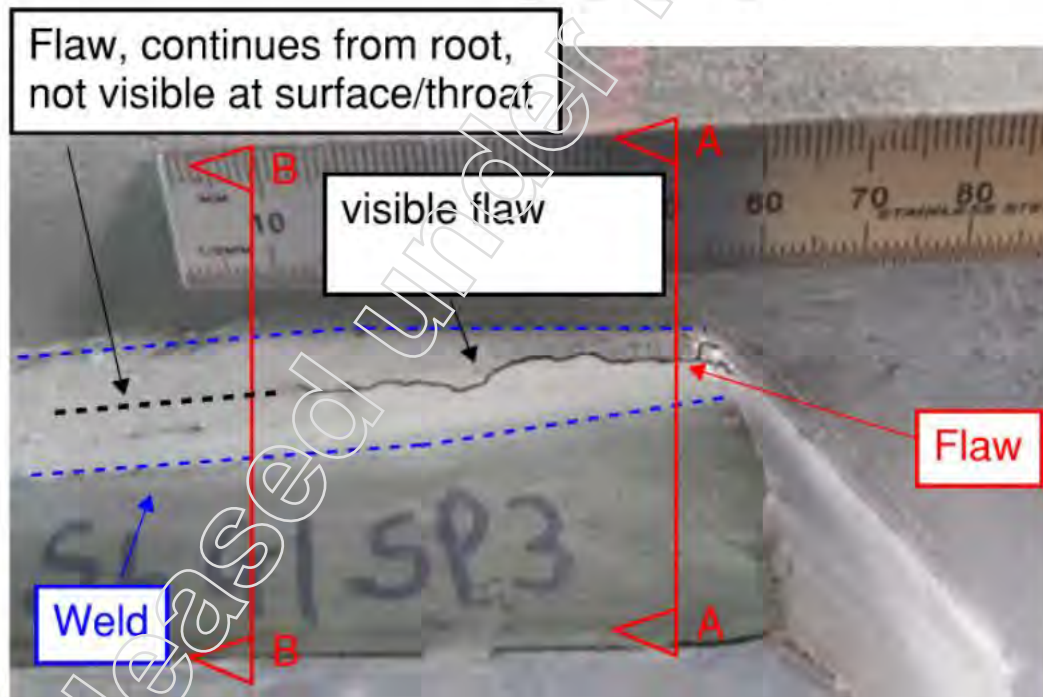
Typical weld defect identified and diagram showing flaw assessed in ECA.
